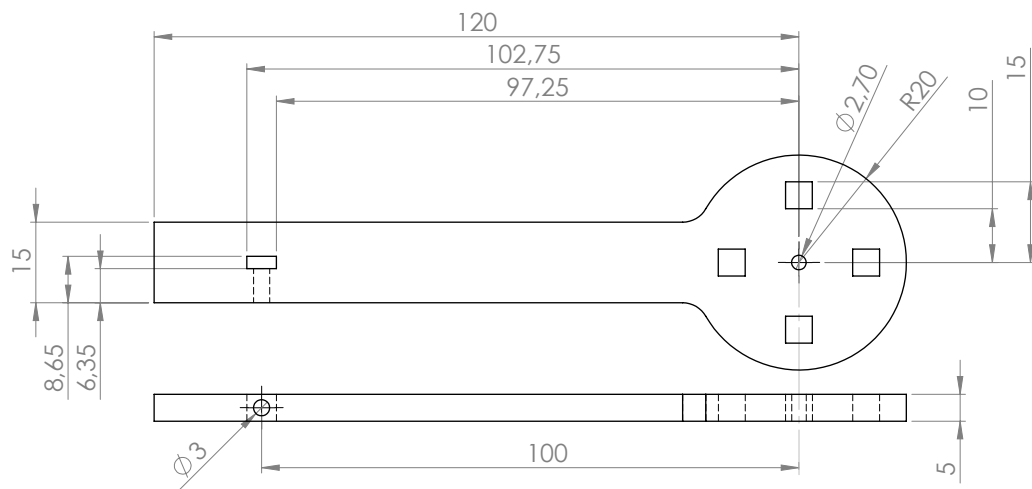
Dimensions of the small external part of the validation set-up from Figure 34. Dimensions in mm.
